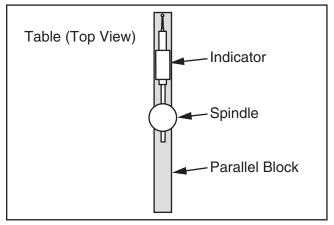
Parallel block and indicator positioned for the Y-axis measurement (top view).
